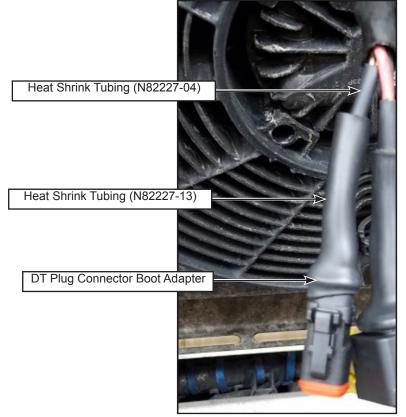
Heat Shrink Tubing Installation on DT Plug Connector Wiring at Fan Side
